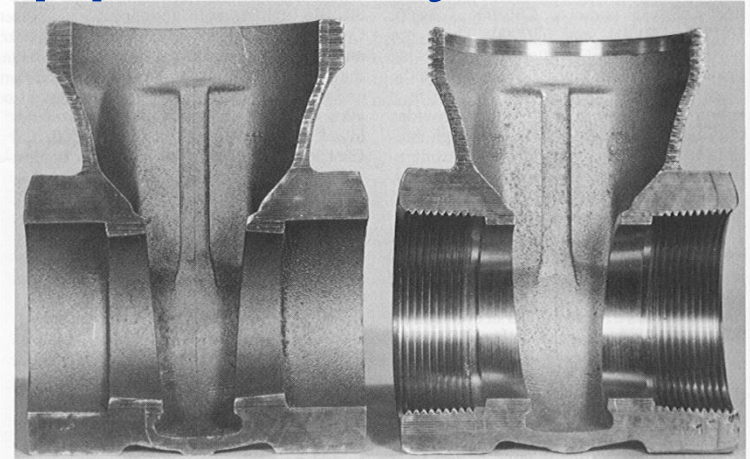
Cutaway views of an as-cast and finish machined/threaded body of a 50 mm (2 in.) gate valve-union bonnet assembly rated at 1.0 MPa (150 psi). The body section was sand cast of C83600 alloy (Cu-5Sn-5Pb-5Zn composition) and weighs 2.4 kg (5.2 lb). Courtesy of Crane Company
